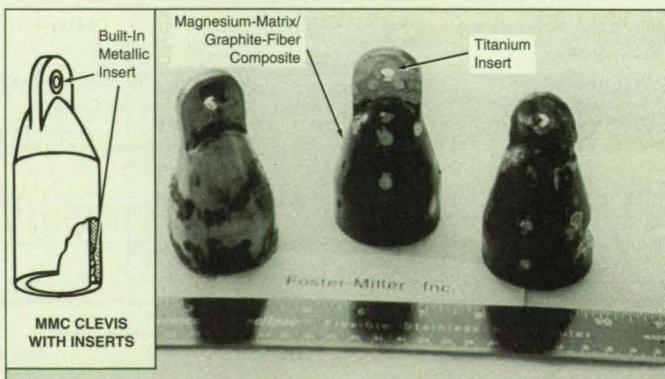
These Clevis Tube-End Fittings are made of magnesium-matrix/graphite-fiber composite with titanium inserts. The composite parts were molded to their final dimensions in a single step.
